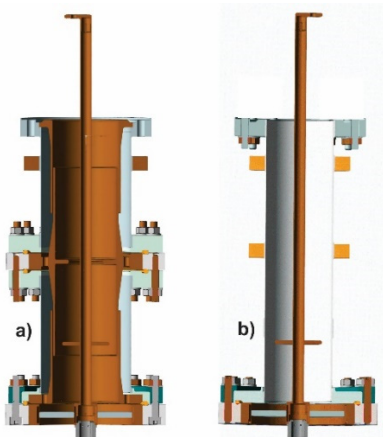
Cut views of vacuum parts of 650 MHz coupler with electromagnetic shields (a) and of conventional coupler with copper coating (b).
